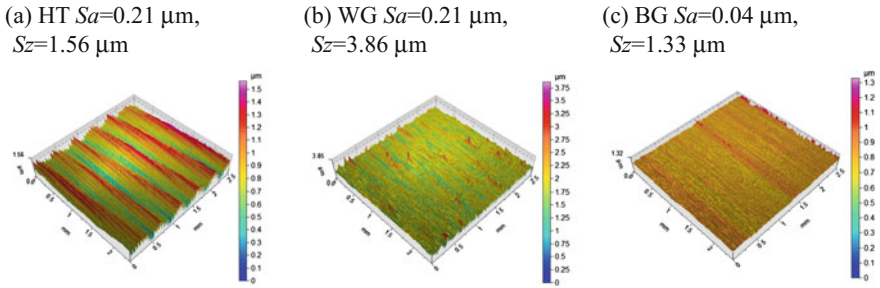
Three surface topographies generated by CBN hard turning (a), wheel grinding (b) and belt grinding (c)
